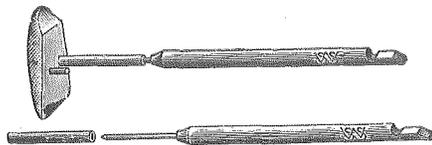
Sleeve Drill Separated, and in Position, for Countersinking Ends of Pins
